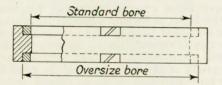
Jig for checking joint clearance in standard and oversize bores, with windows for viewing joint
